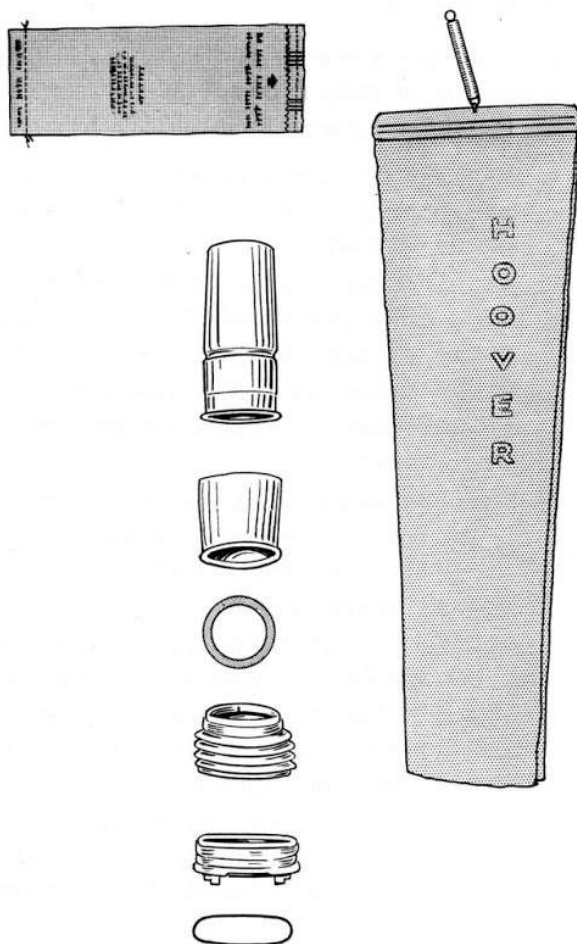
A—Throw-away bag assembly. Used on 31-63-64-65-66
